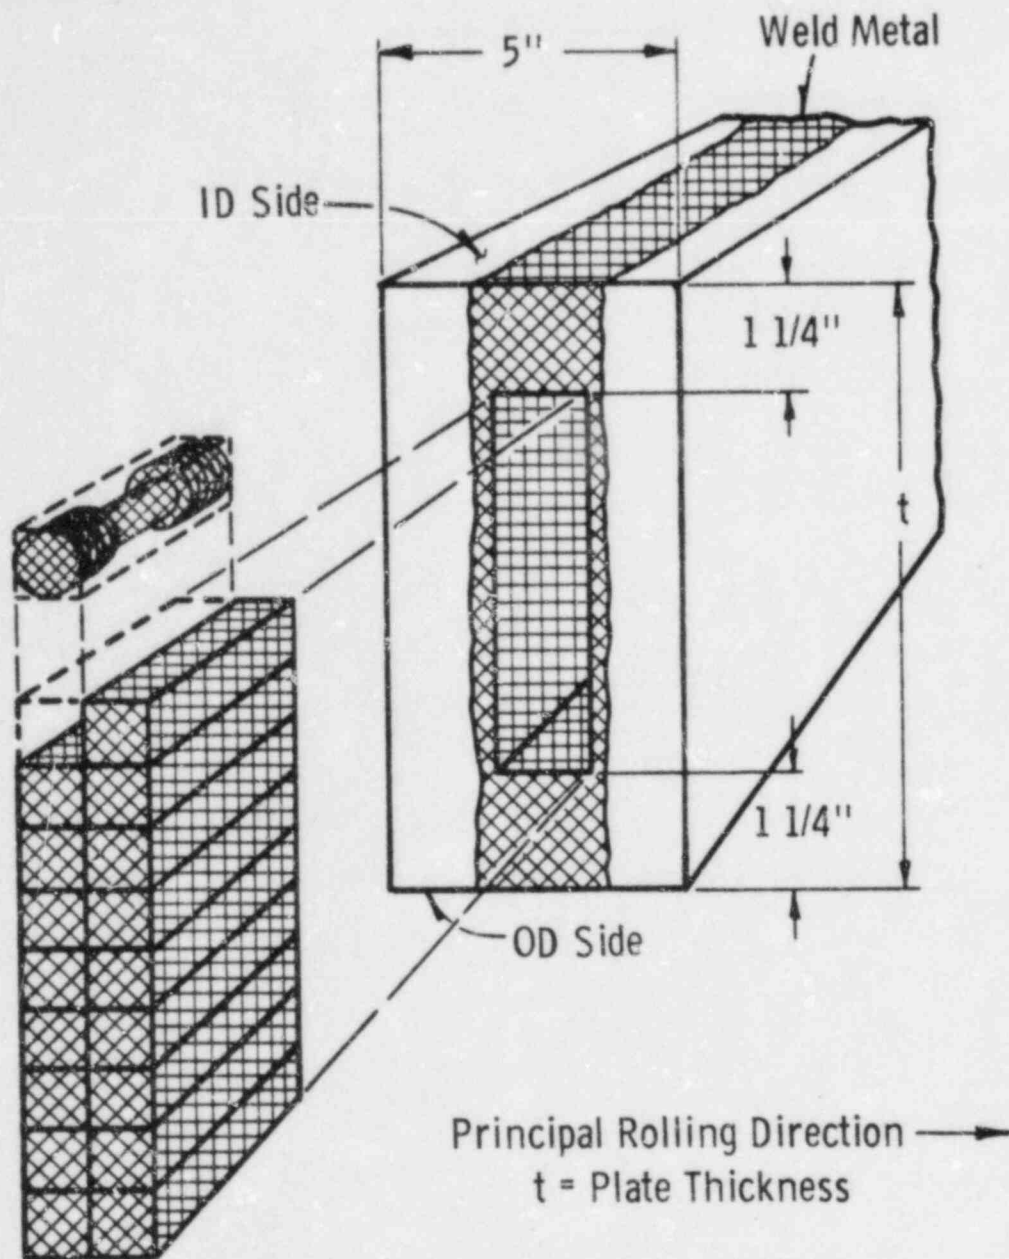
LOCATION OF TENSILE SPECIMENS WITHIN WELD METAL TEST MATERIAL
